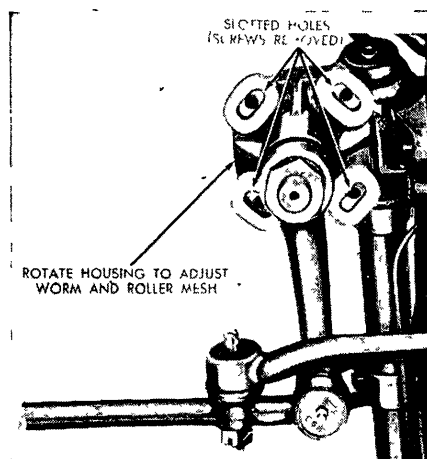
A Worm and roller mesh adjustment in Gemmer (4)
